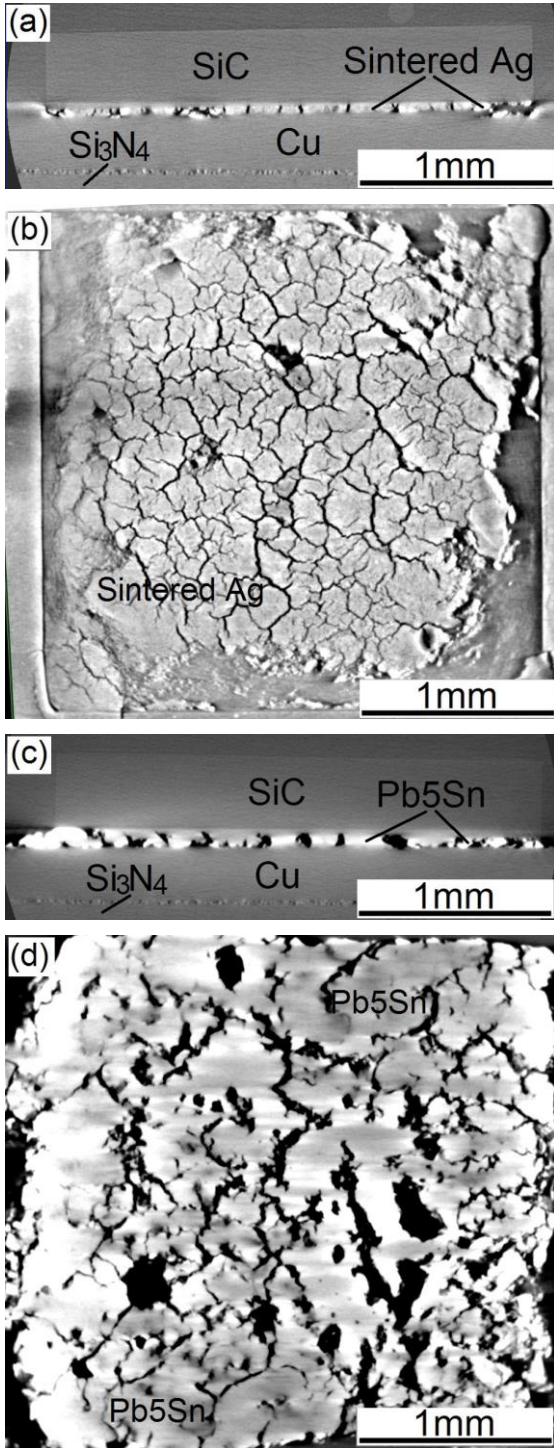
Reconstructed X-ray CT images obtained from: (a) one sintered Ag joint, x-z cross section, (b) the same sintered Ag joint, x-y plane; (c) one Pb5Sn solder joint, x-z cross section; (d) the same Pb5Sn solder joint, x-y plane, after 2000 cycles of thermal cycling.
